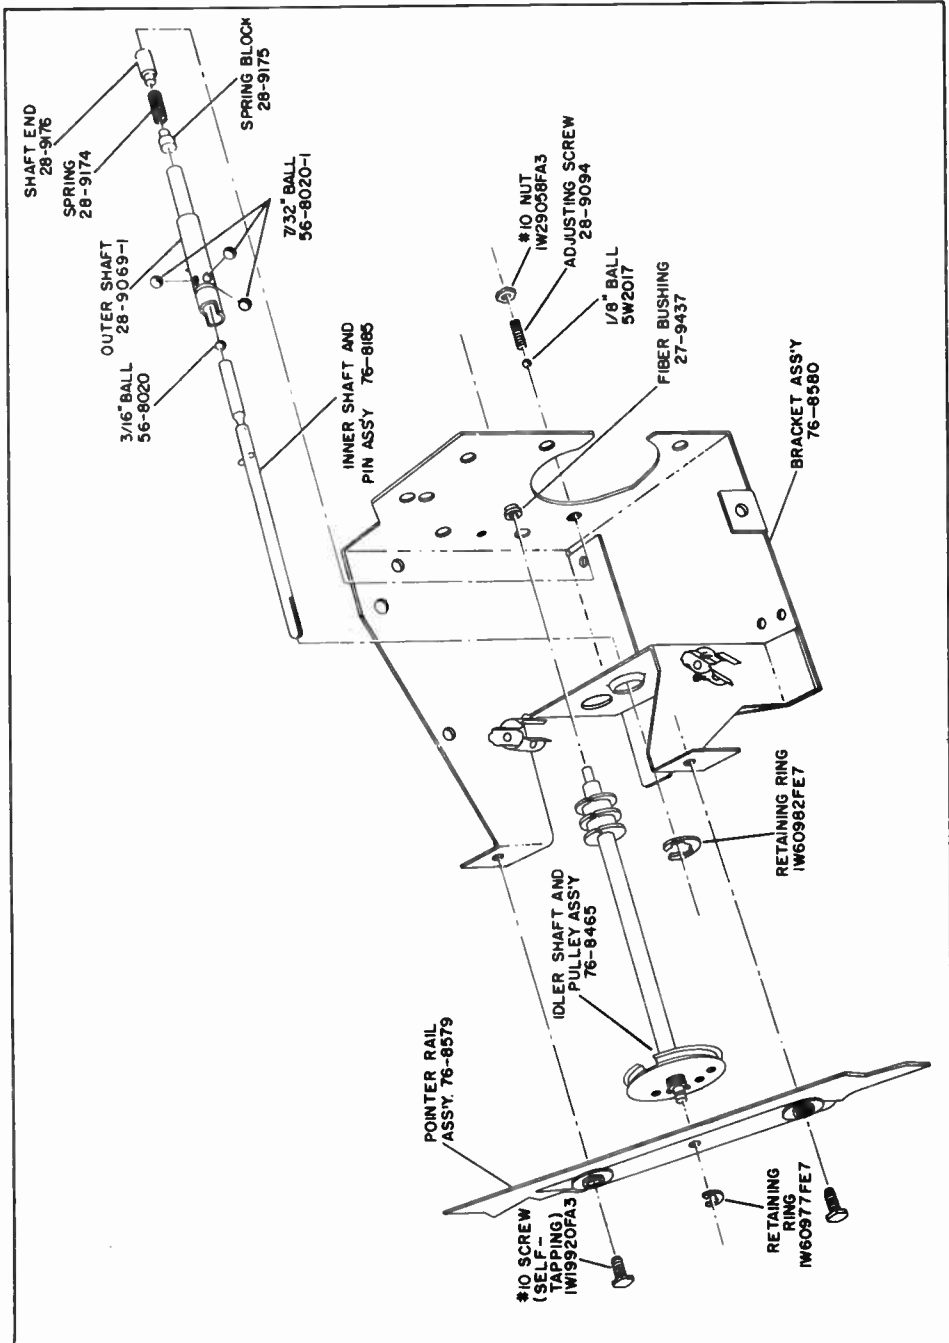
Planetary Drive Assembly, Exploded View, Showing Mechanical Construction
